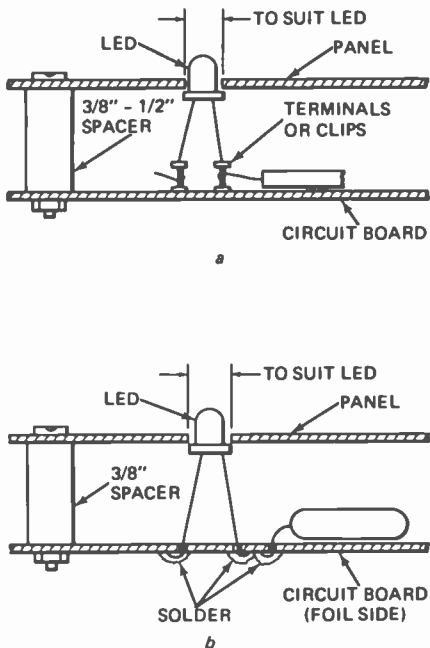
HOW LED'S CAN BE MOUNTED as panel indicators. The sub-panel may be perforated board (a) or standard PC board (b).
